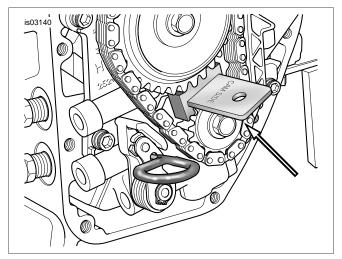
Camshaft/Crankshaft Sprocket Locking Tool
